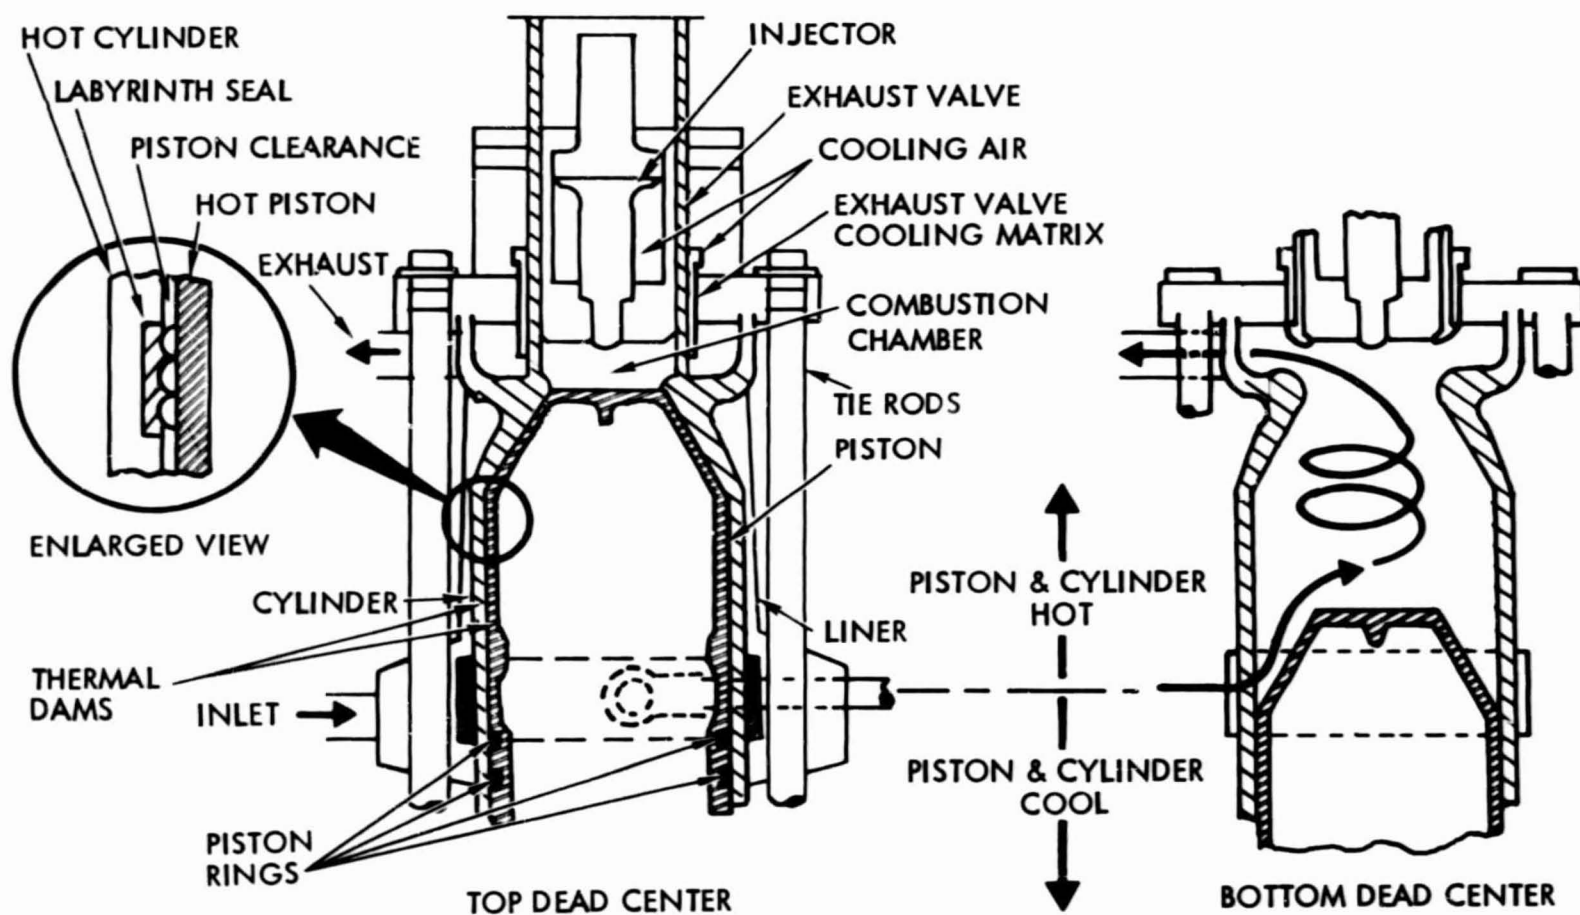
Johnston Engine Cylinder and Piston Configuration (Ref. 53)
